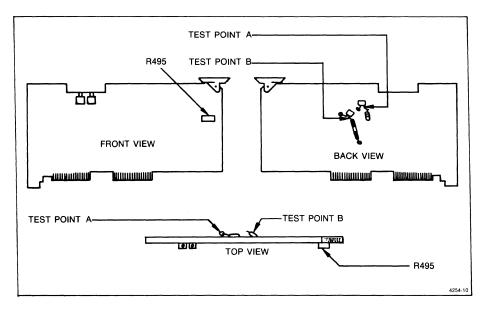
Location of trimmer potentiometer R495 and test points on 91AE04 modules.
